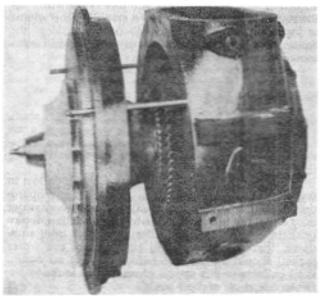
Intermediate and Turbine Casing-Method of Assembly and Disassembly.
